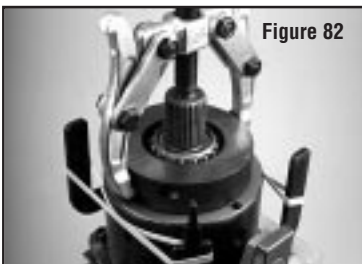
To help in the assembly of the swashplate and rotating group into the pump housing, reinstall the bearing puller on the rear bearing. The bearing puller can now be used as a handle to assemble the swashplate, rotating group and shaft assembly into the pump housing. (see Figure 82)
